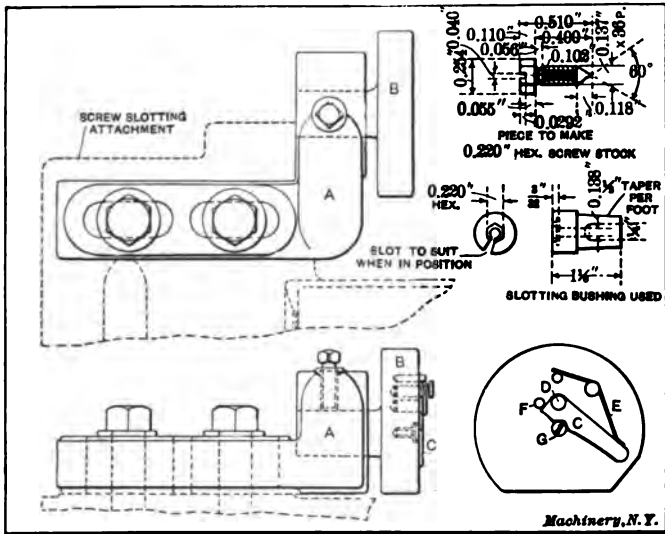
Device for Locating Hexagon-head Screws in the Slotting-bushing
